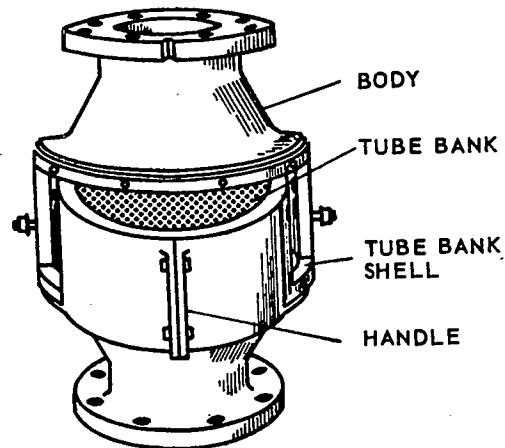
Corrugated metal flame arrestor with cone removed and tube bank pulled partly off the body.
